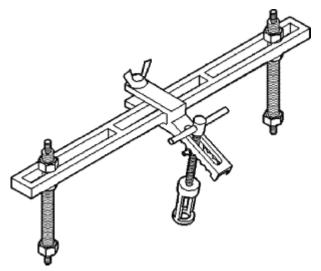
Valve Spring Compressor MD-998772-A Courtesy of CHRYSLER LLC
